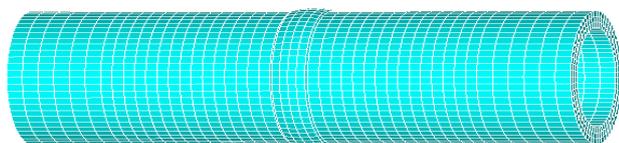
2D Pipe Girth Weld Seam Model
